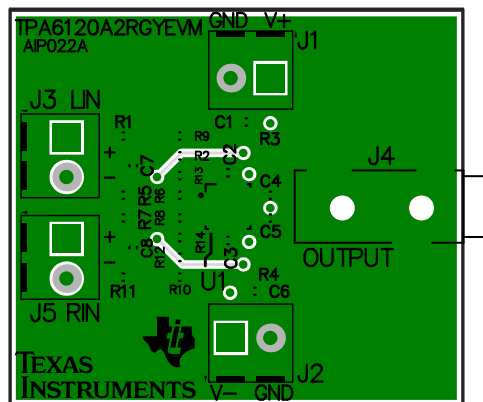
Example PCB Layout, Middle-1 Layer and Silkscreen, Top View
